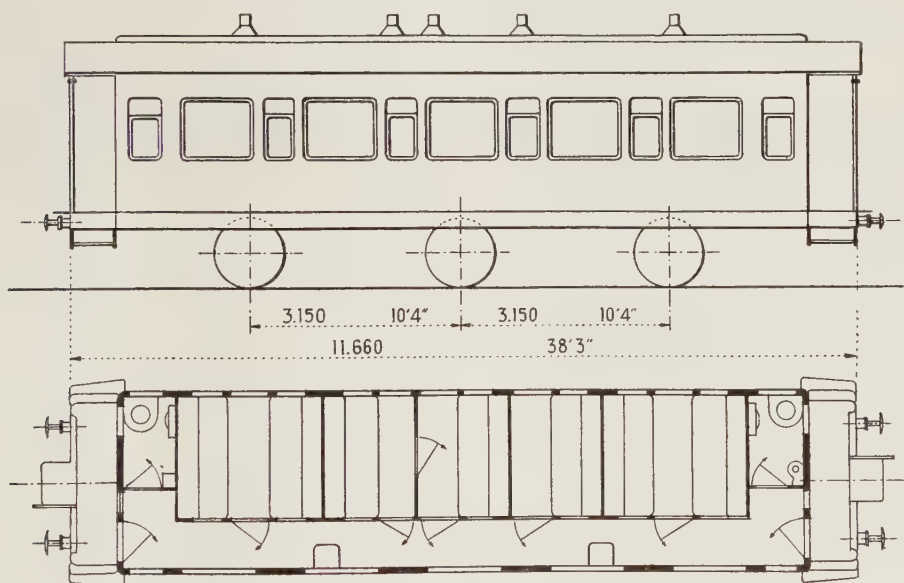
Old six-wheeled sleeping-car built at the La Croyère Works, about 1875, for the *Int. Sleeping-Car Co.
